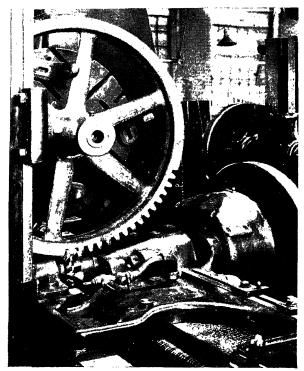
Cutting a gear with a hob, a machine built primarily to cut gear teeth. (Brown and Sharpe.)
